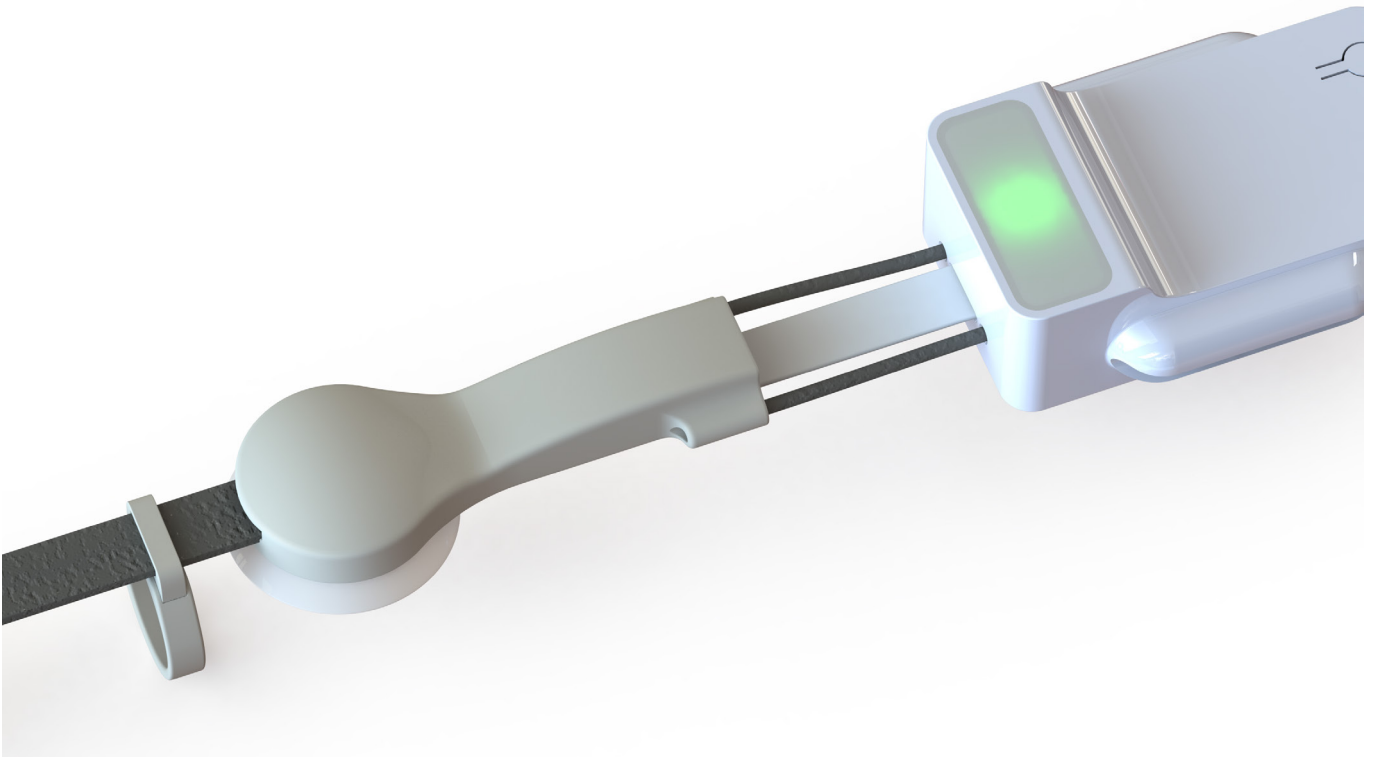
Detail view of 3D model of the knuckle holder and wrist worn electronics enclosure
